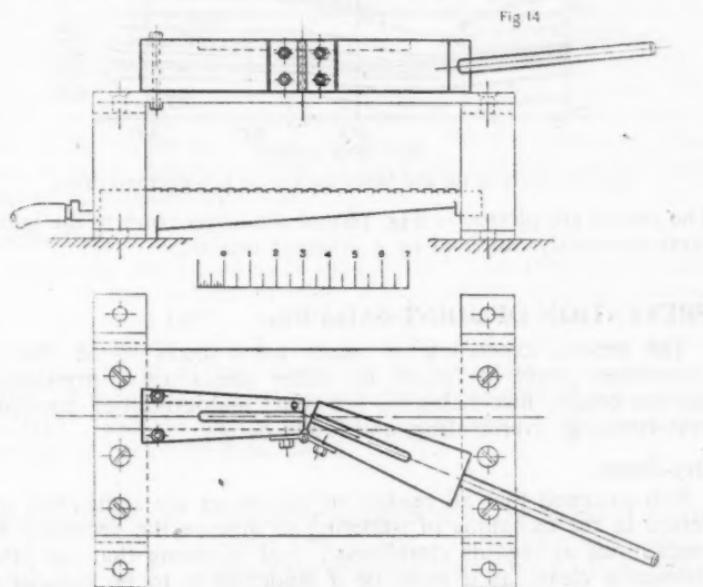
Sketch of open mould used for determining the hot-shortness limit of solders on cooling.
